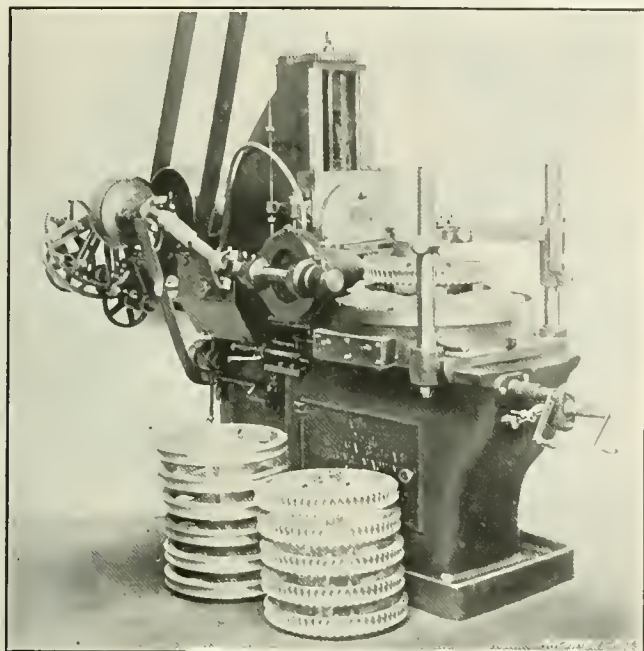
Hobbing Worm-wheels on the Farwell Machine
